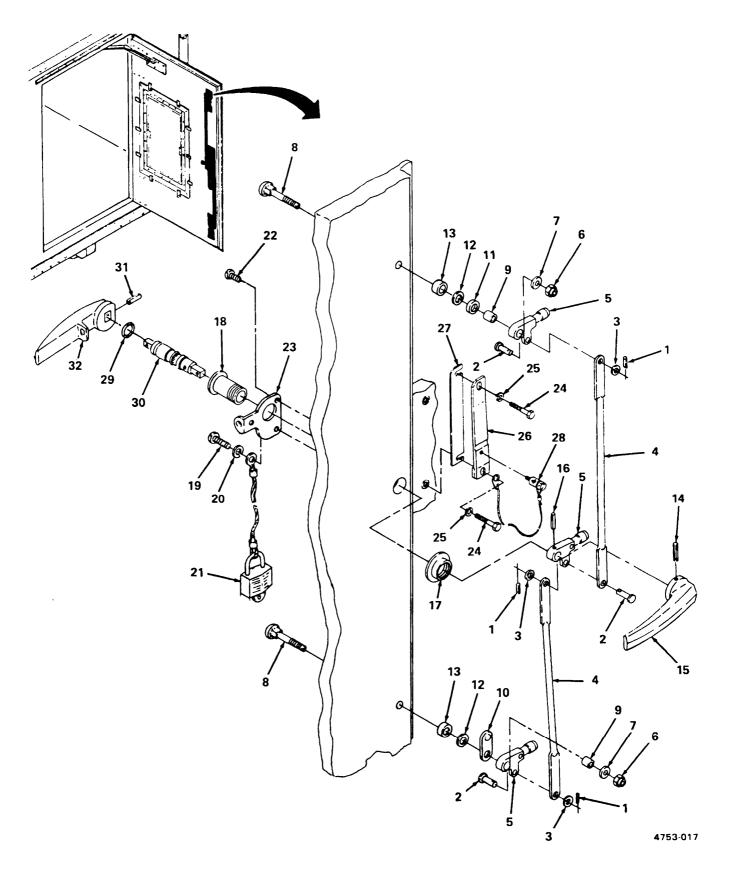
Door Latch Assembly Removal and Disassembly.
